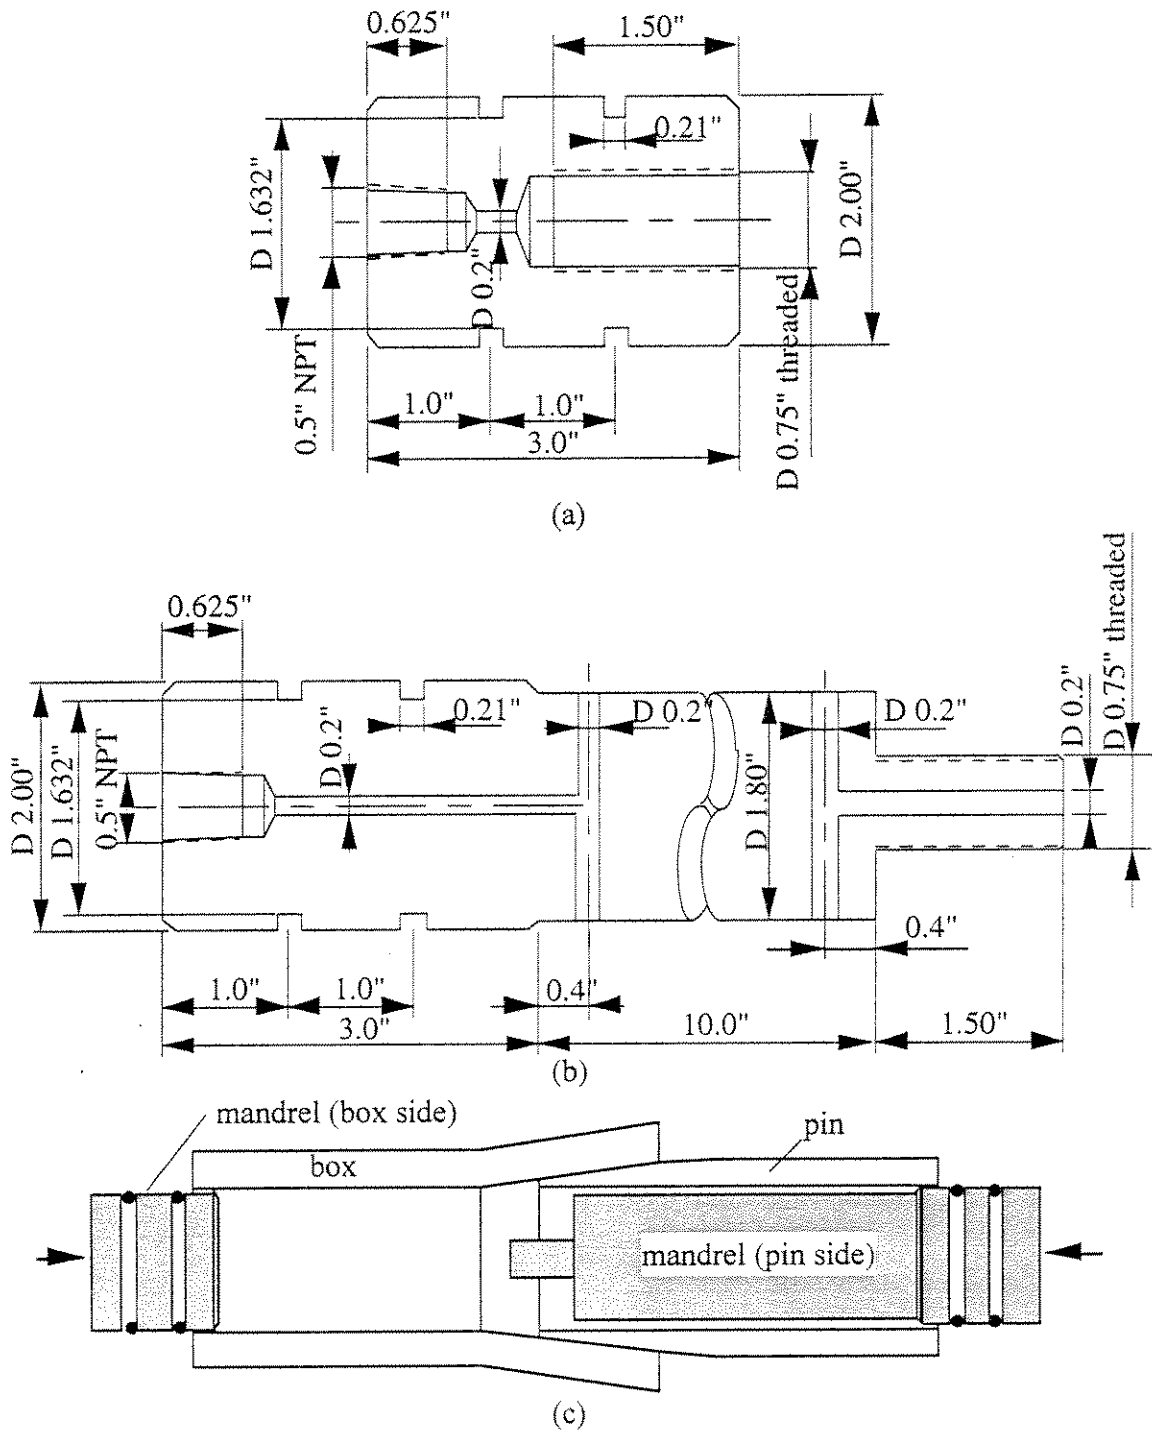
Threaded Tubular Composite Joint Tests; (a) Pin-side Mandrel, (b) Box-side Mandrel, and (c) Installation of Two-piece Mandrel
